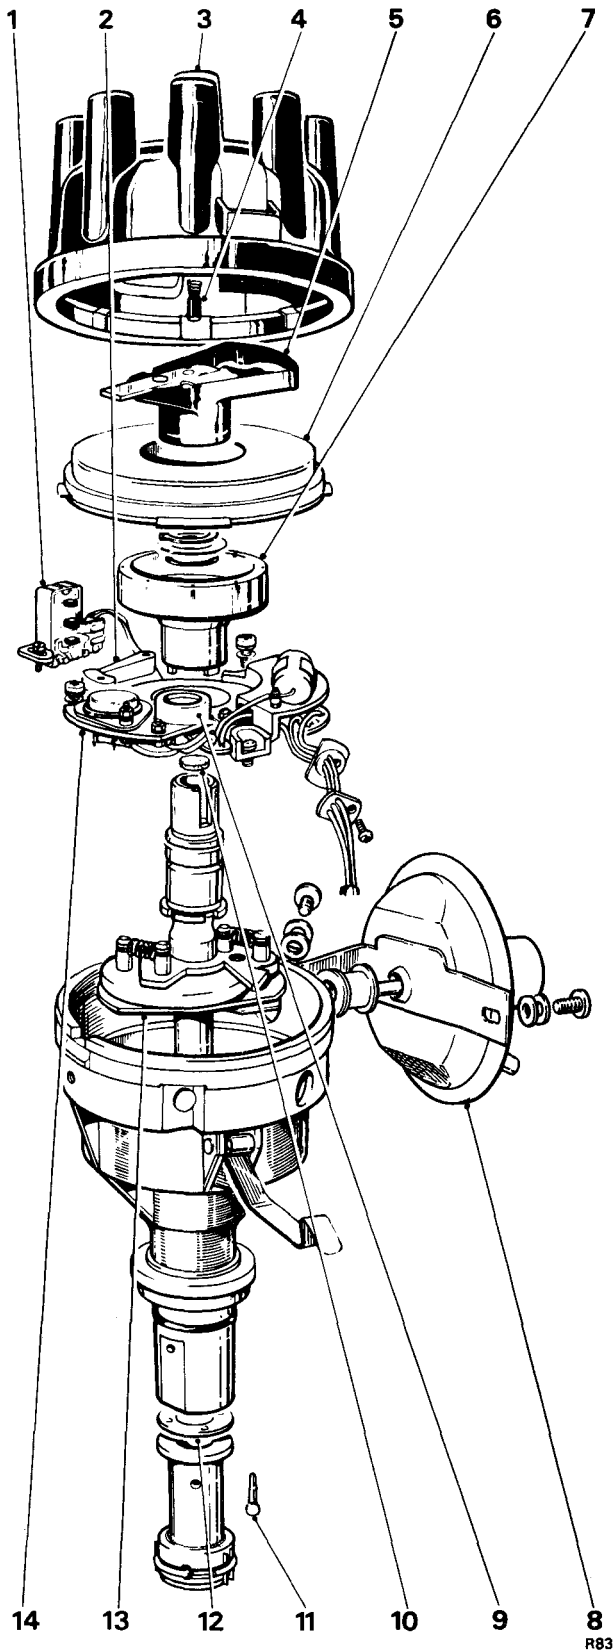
EXPLODED VIEW OF DISTRIBUTOR
